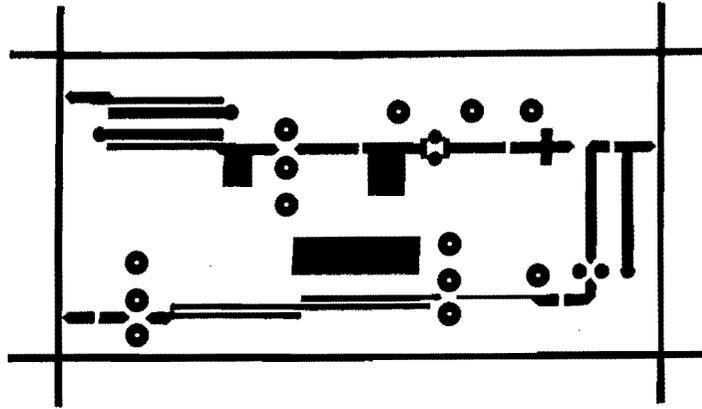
2304MHz RF front-end PCB (0.8mm double-sided FR4).
